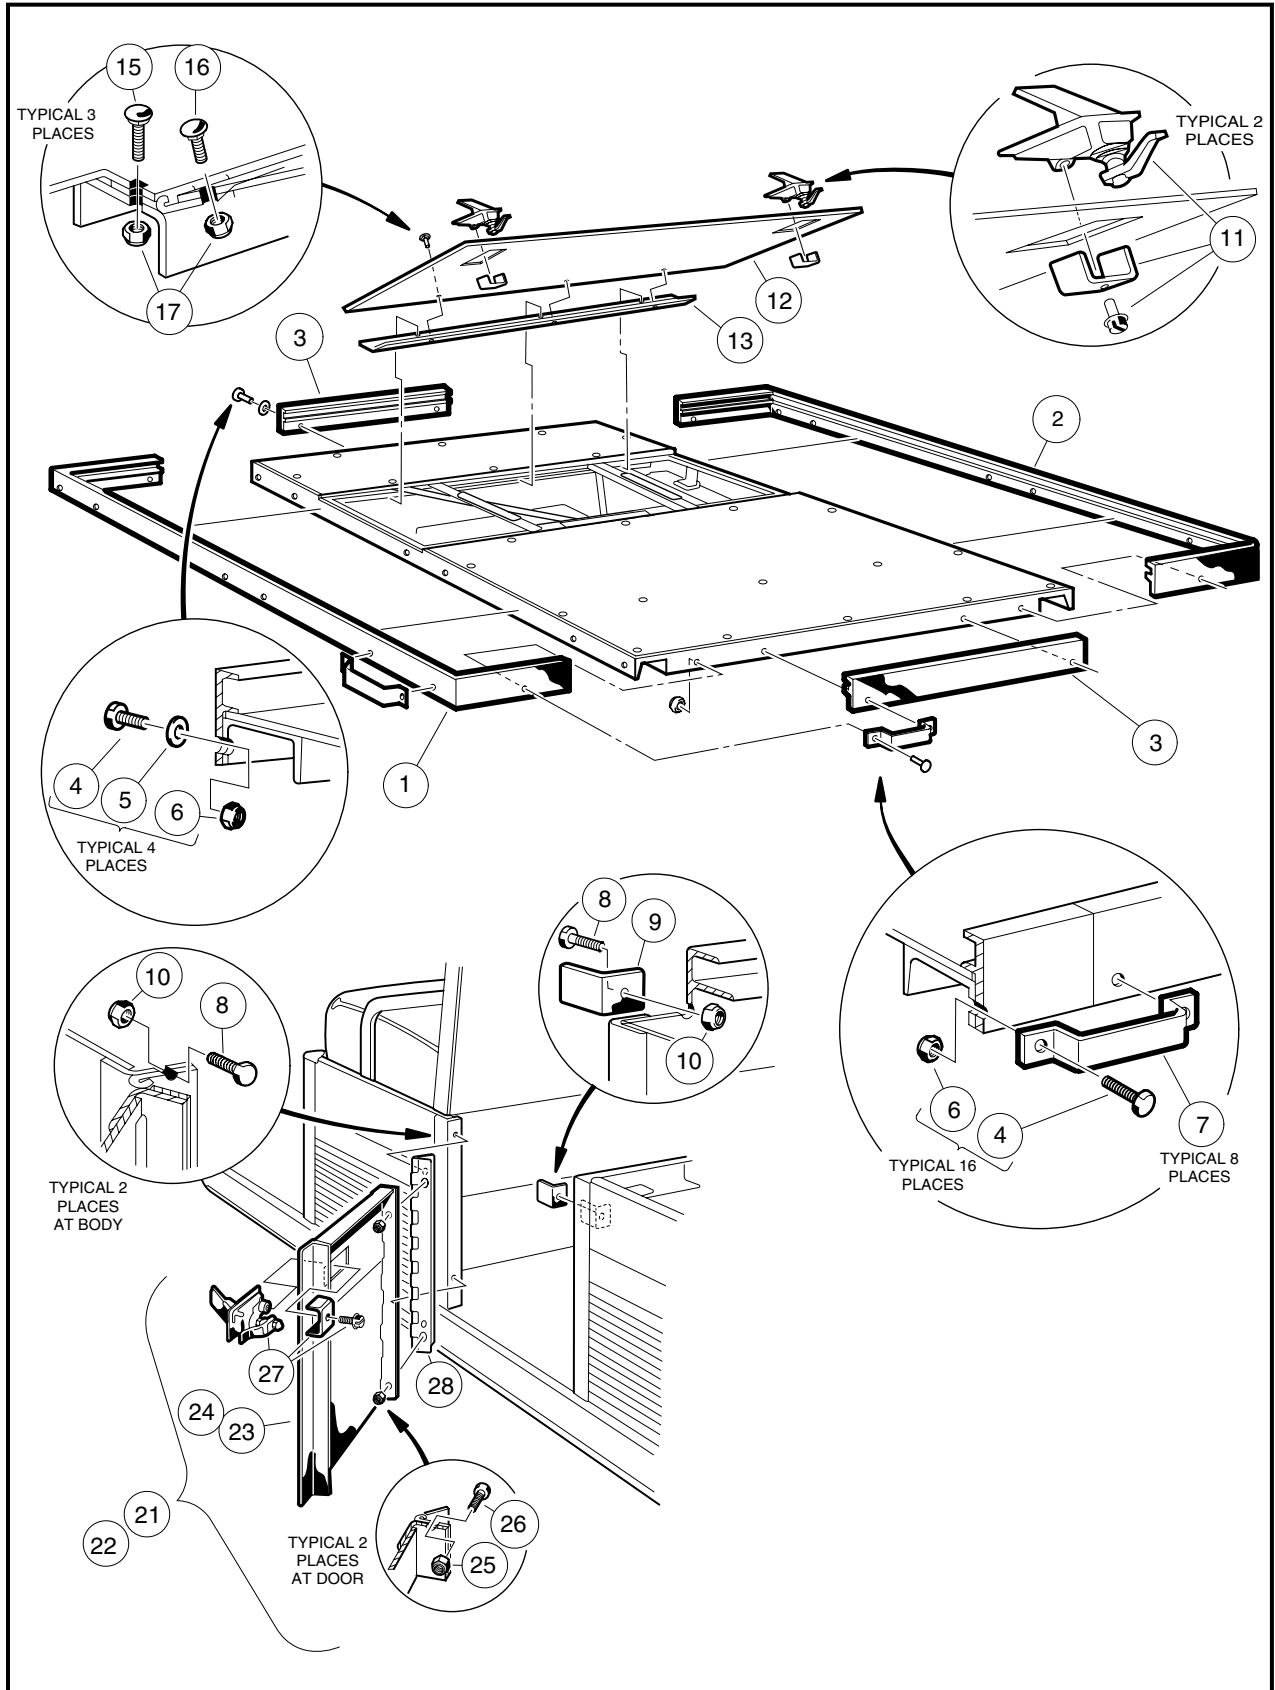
Flat Bed Trim, Access Door and Side Door - Turf 6 and Carryall 6
